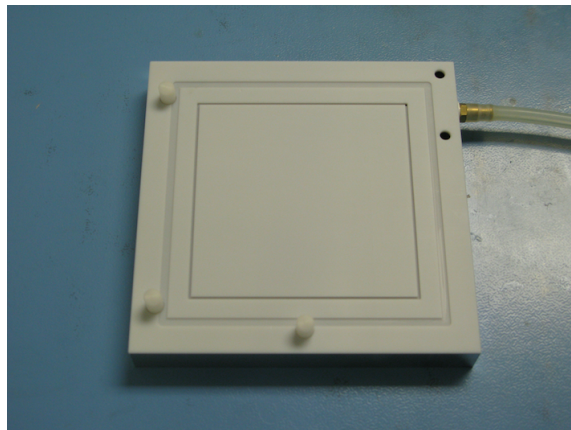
Baseboard assembly plate and facings vacuum chucks.
